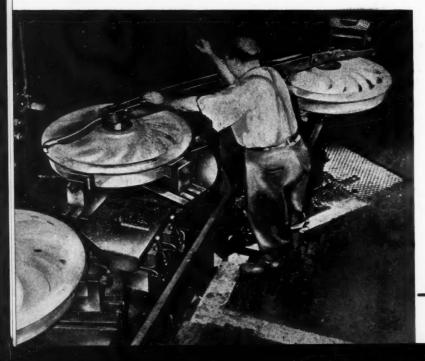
Automatic Wheellifting Device for Loading and Unloading Car Wheels Held on Sliding Table of the Boring Machine Illustrated in Fig. 1
